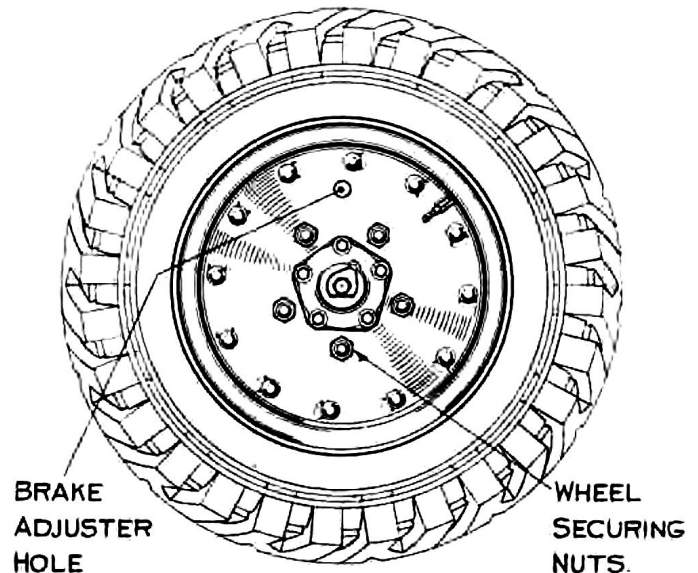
WHEEL AND TYRE ASSEMBLY.
